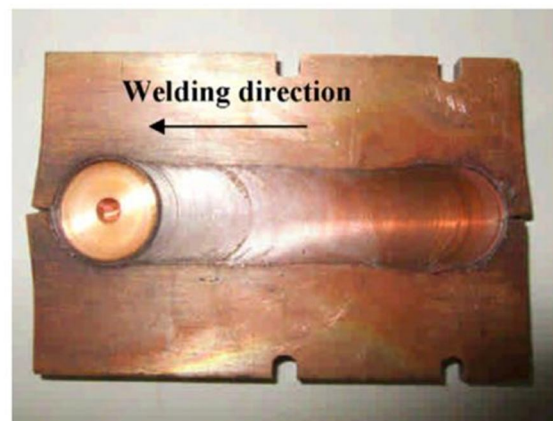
Appearance of a welded product for $\omega=900$ rpm and $v=50$ mm/min.
